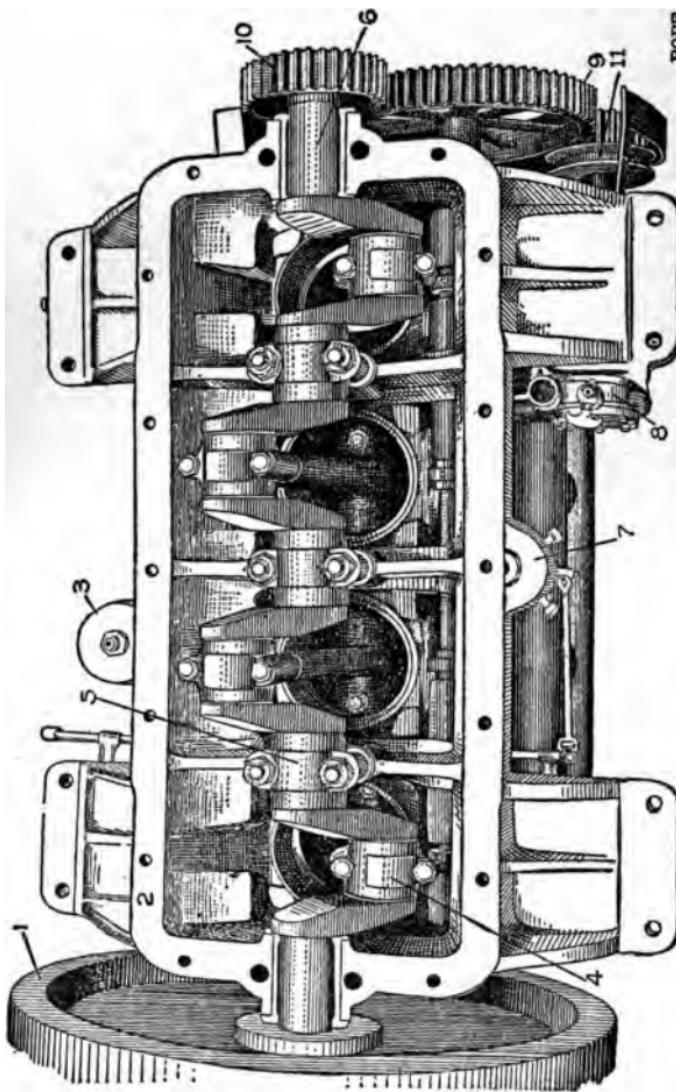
Crank-case view of the crank-shaft of a four-cylinder engine, its bearings, cylinder ends, pitmans, and other parts assembled. Parts are: 1, fly-wheel; 2, upper member of crank-case, with brackets; 3, carburetor; 4, pitman bearing cap; 5, crank bearing cap; 6, crank-shaft; 7, commutator or distributor; 8, pump for water circulation system; 9, fly-wheel cap; 10, cam-shaft gear; 11, pulley for driving the air-cooling fan.
